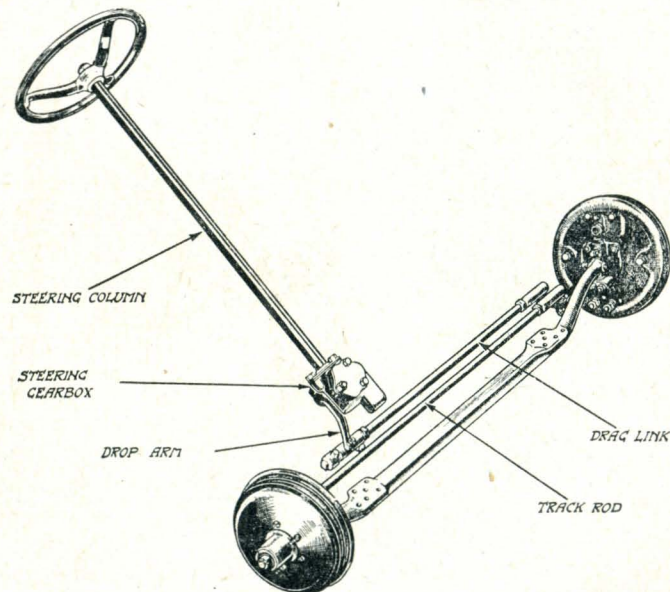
THE BISHOP CAM STEERING GEAR FITTED TO THE FOUR-SPEED MINORS
